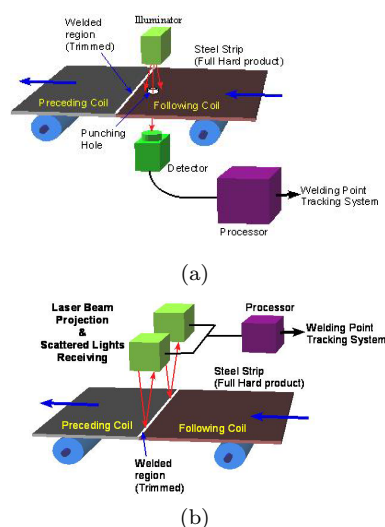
Punching type welding position detection(a) and punchless detection(b) of flash butt welding
